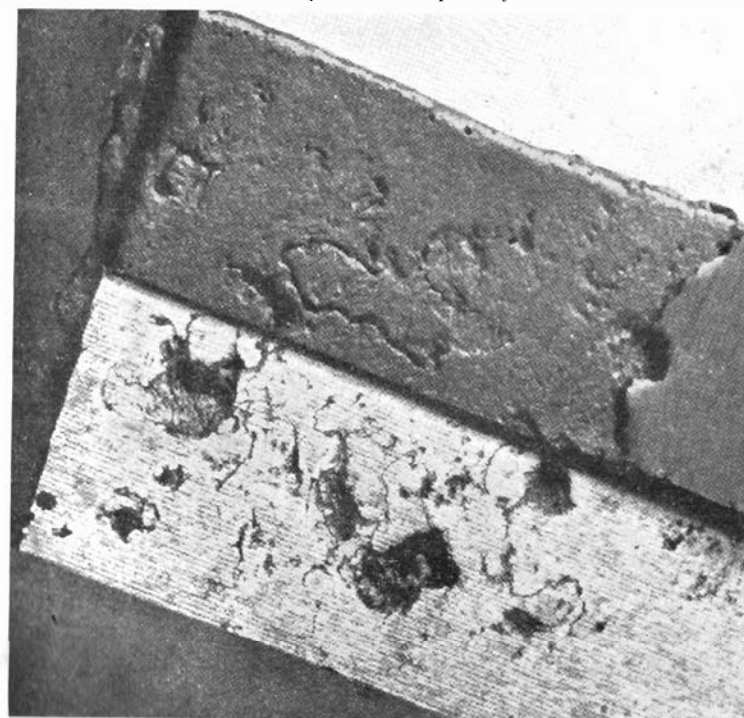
Inclusions in an spheroidal graphite iron casting. Part of the surface has been machined away to show the nature of the defect more clearly.
